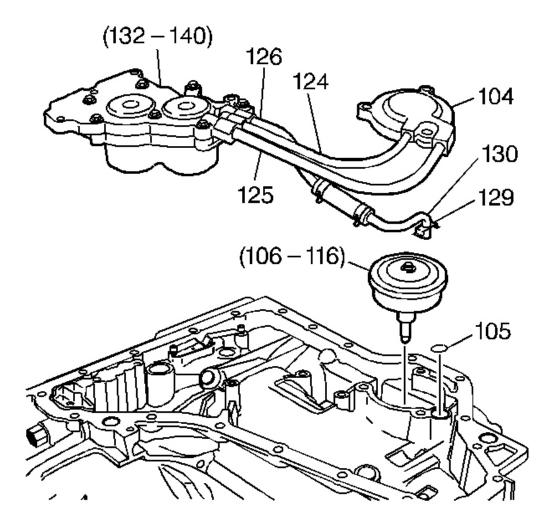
Disconnecting 1-2 & 2-3 Accumulator Assembly & Manual 2-1 Band Servo Assembly
